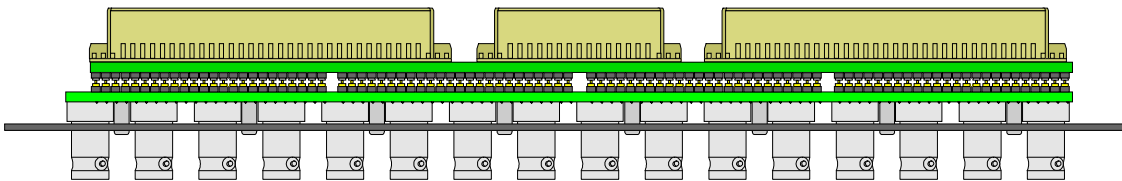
Side View of the Integrator High Definition Backpanel Assembly
